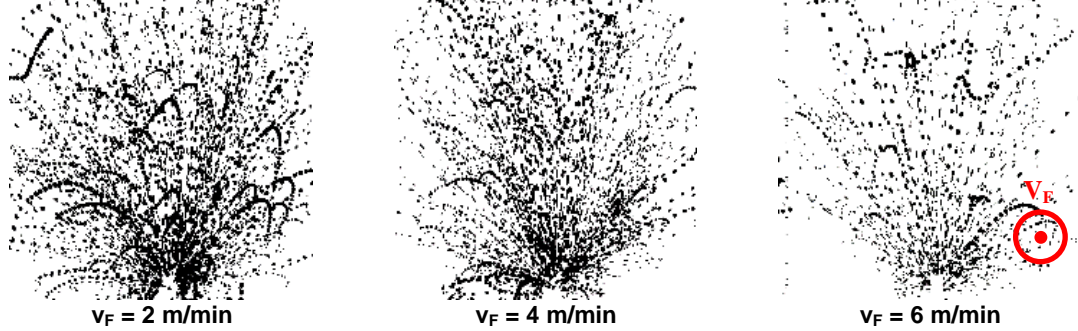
Reducing spatter occurrence for rectilinear welding with $P_L = 2.5$ kW, $d_f = 290$ μ m, $l = 200$ mm.
